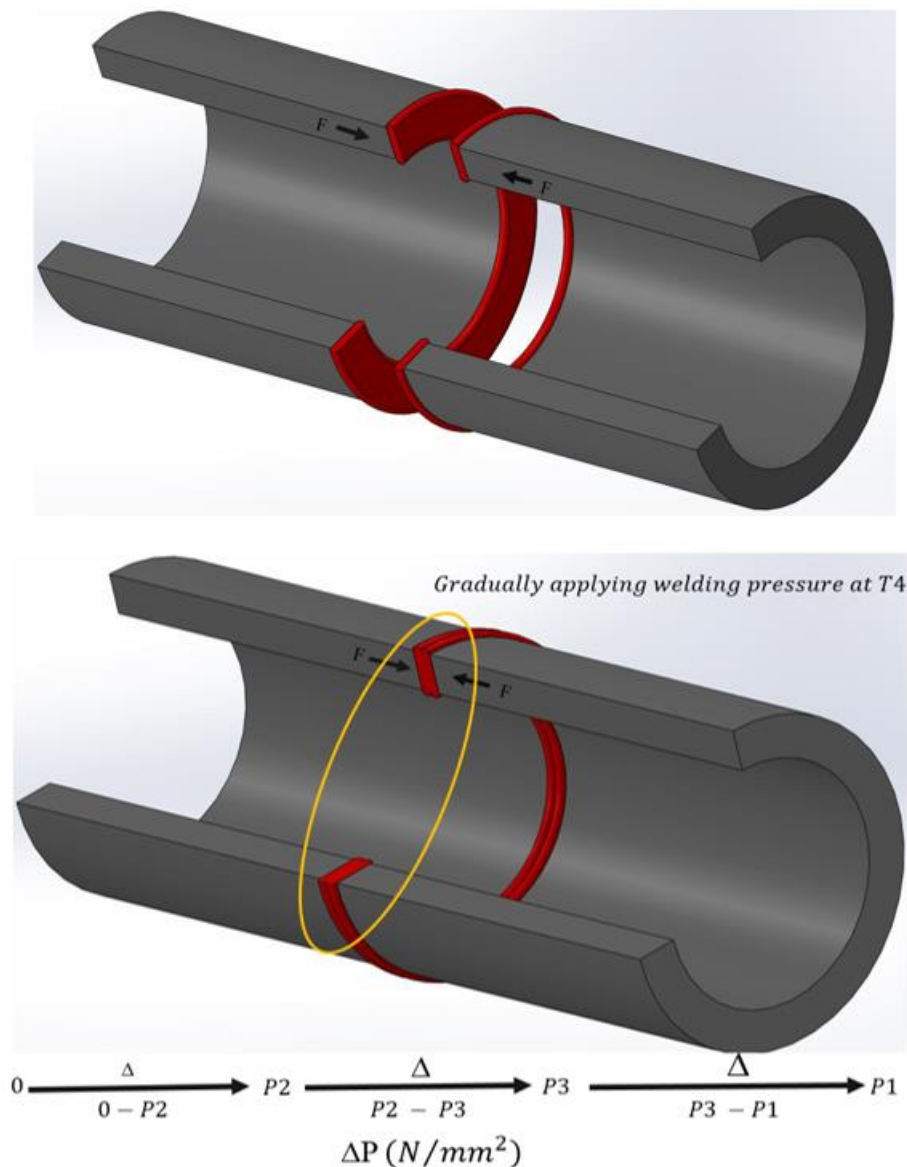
The gradual application of joining pressure at T4 to improve butt fused joints
